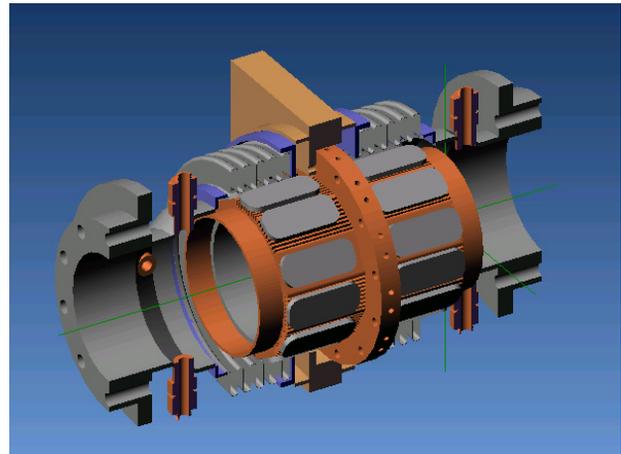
One example of the improved HOM load in the existing bellows assembly.
